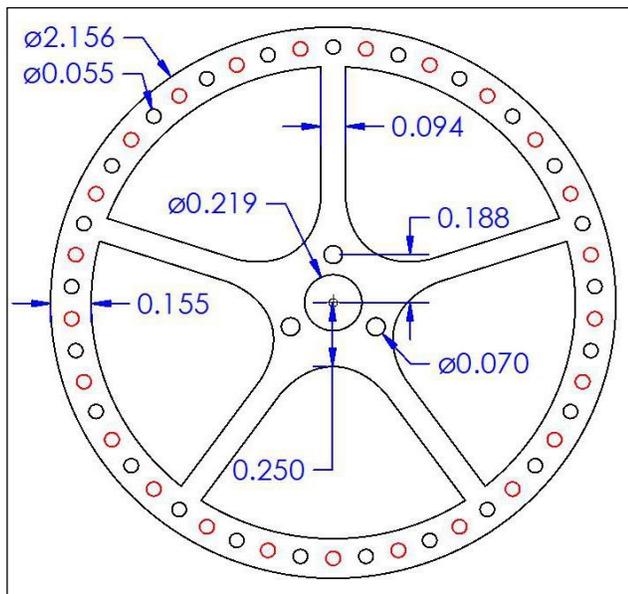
Escape wheel construction drawing. The Red holes indicate the wire is located on the back of the wheel and the Black holes indicate the wire is located on the front.
